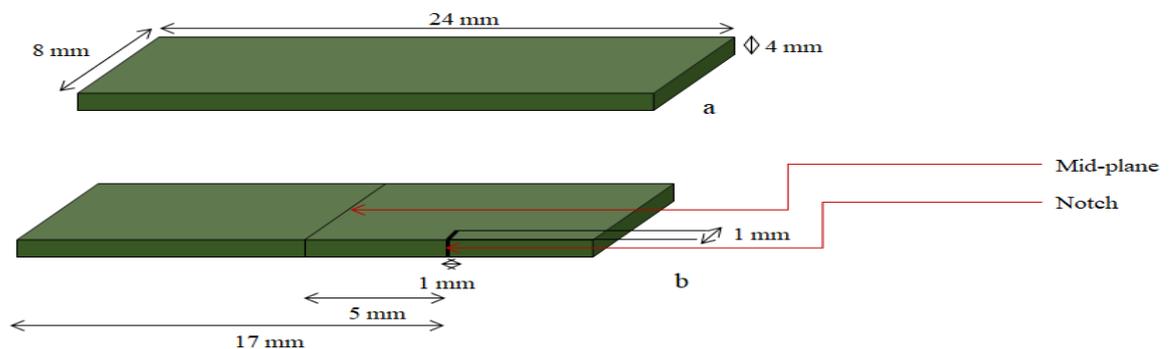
Specimen dimensions for Short-Beam Shear (SBS) test as per ASTM D2344
